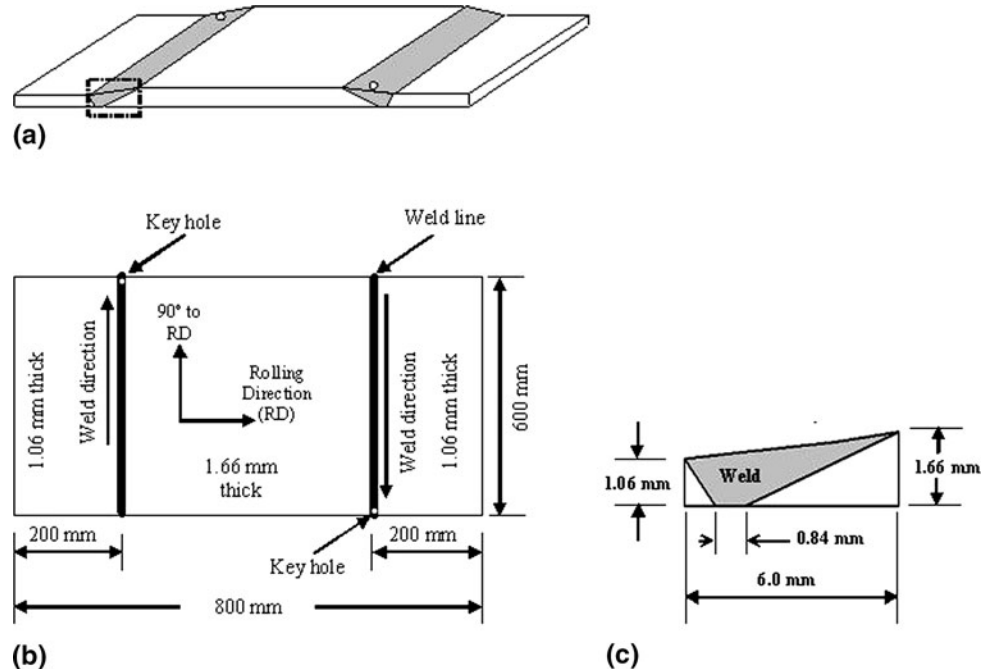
(a) Schematic of the tailer-welded blank, (b) top view of the TWB, and (c) weld cross section through the thickness of the TWB showing the general weld dimensions
